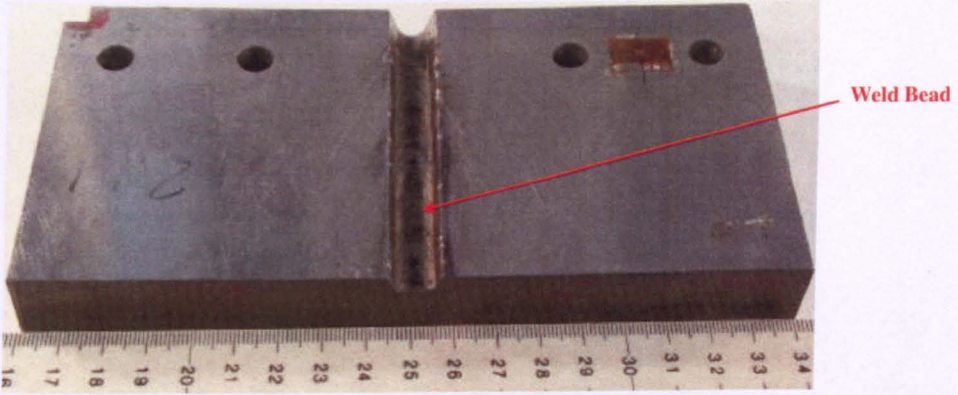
Schematic view of single bead weld (316 austenitic stainless steel)
